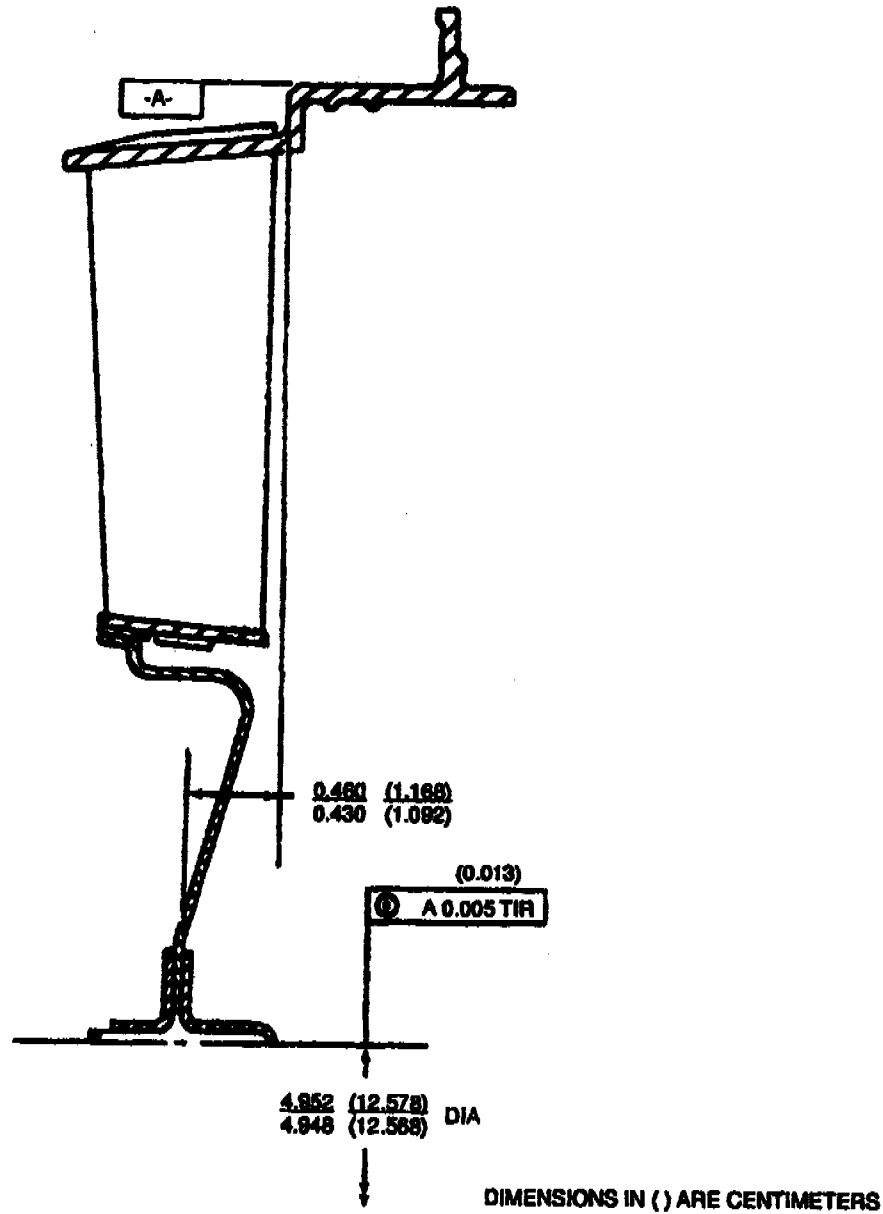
Finish-Machine Dimensions - Seal Area.
